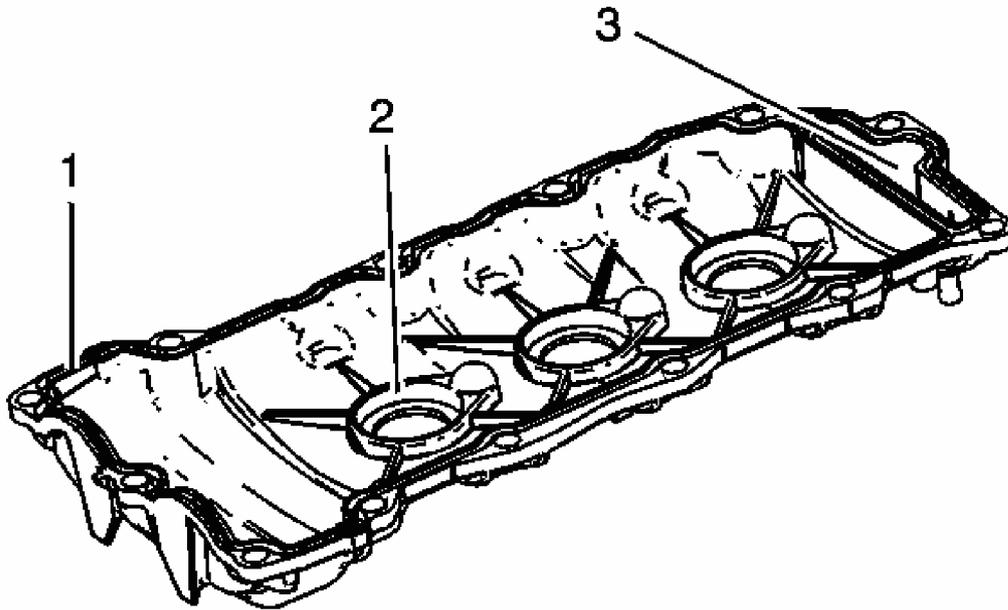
Inspecting Interior Of The Right Camshaft Cover
